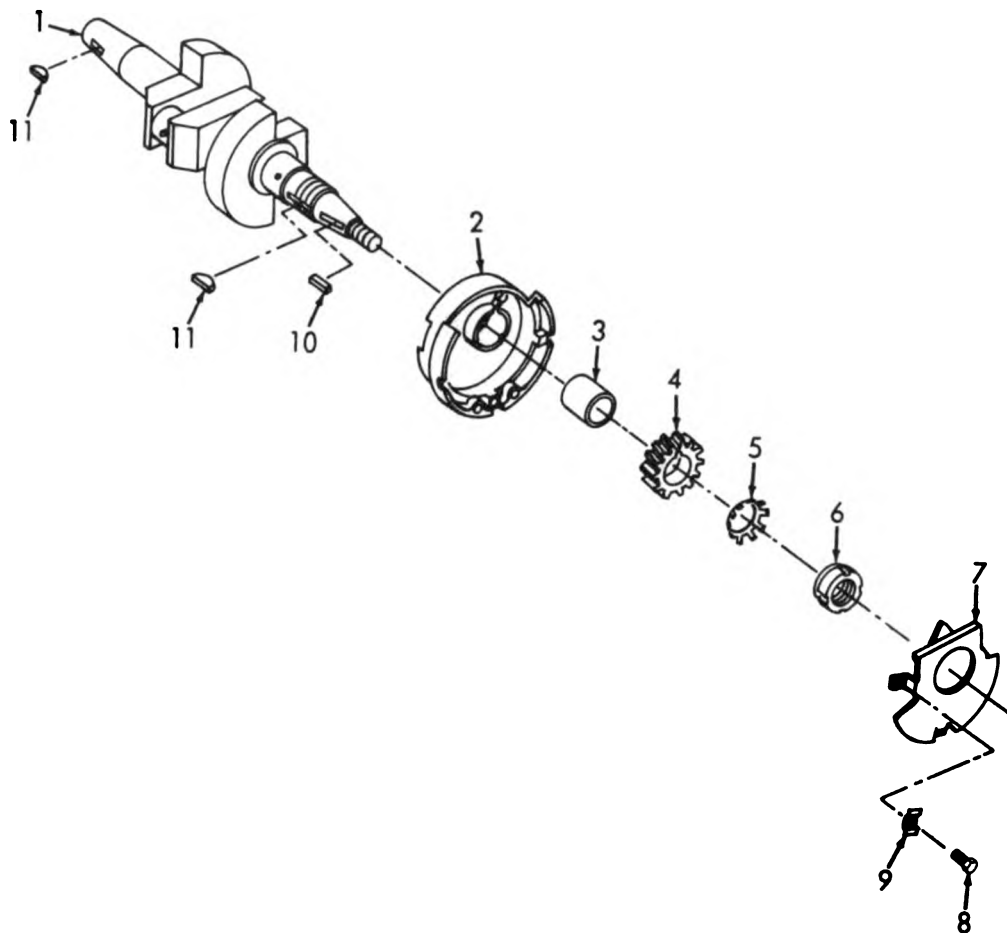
Camshaft, camshaft gear, and bearing, removal and installation.
